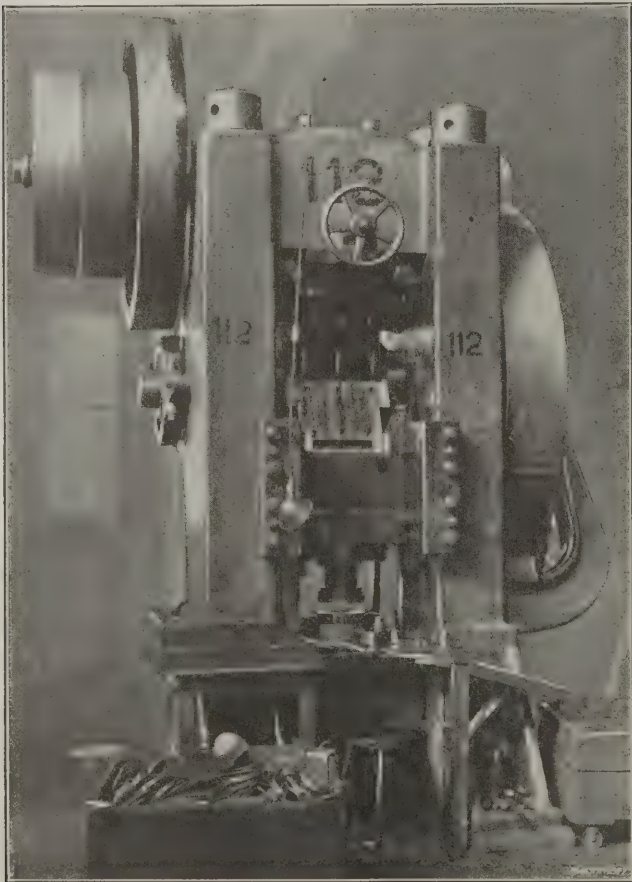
Heavy Knuckle-joint Press used for Cold-forging
